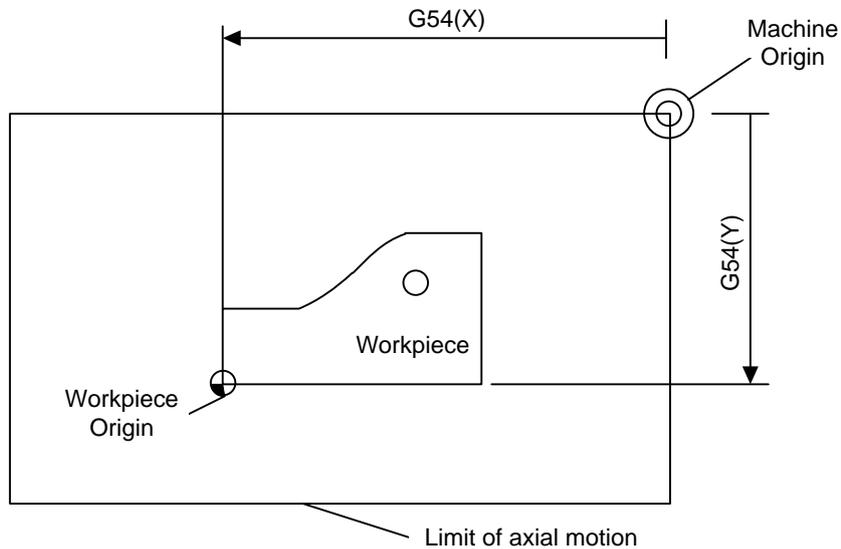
The Relationship of Workpiece Offset and Mechanical Coordinate System
